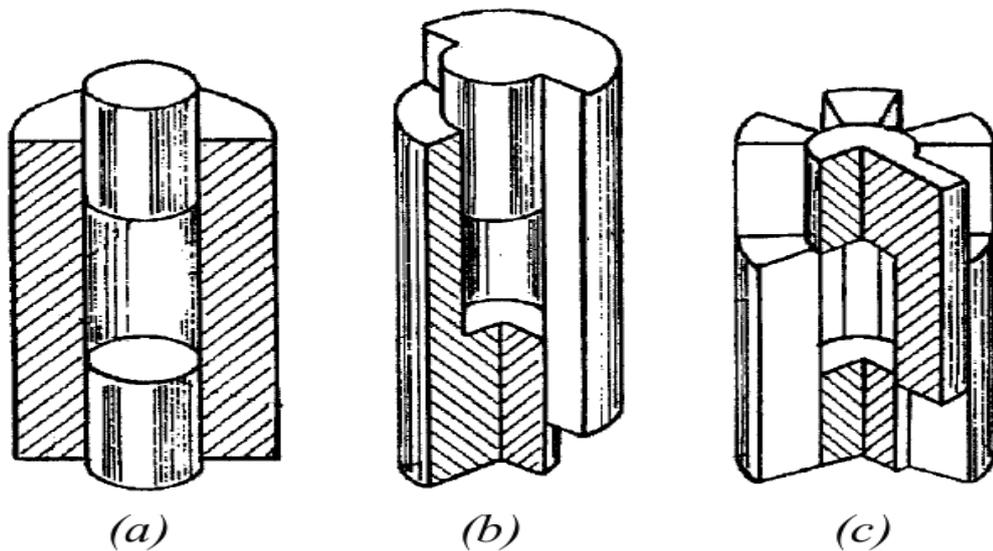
Representation of uniaxial press (a) and collector pressing dye with 2 passive compose (b) and six passive component (c) [9]
